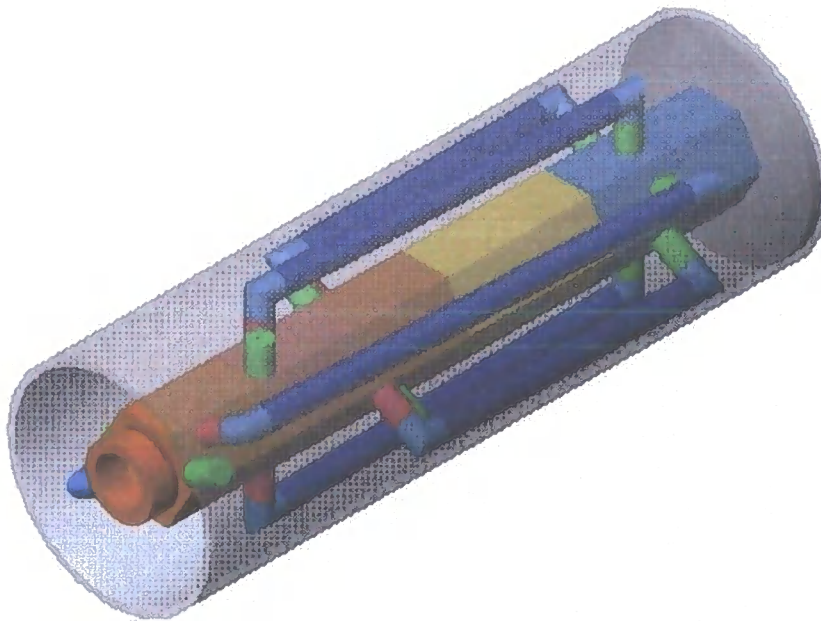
Multi-section piston chamber with inlet valves, PM braking system chamber, and 6:1 ratio outlet valve manifold chamber.
